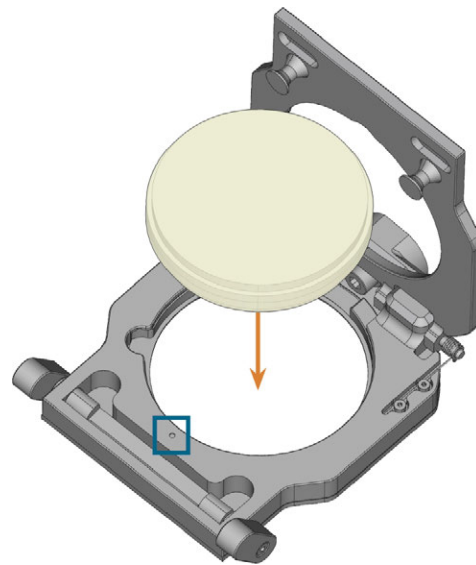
INSERTING A DISC INTO THE BLANK HOLDER (POSITION FOR SAFE REMOUNTING MARKED BLUE)
